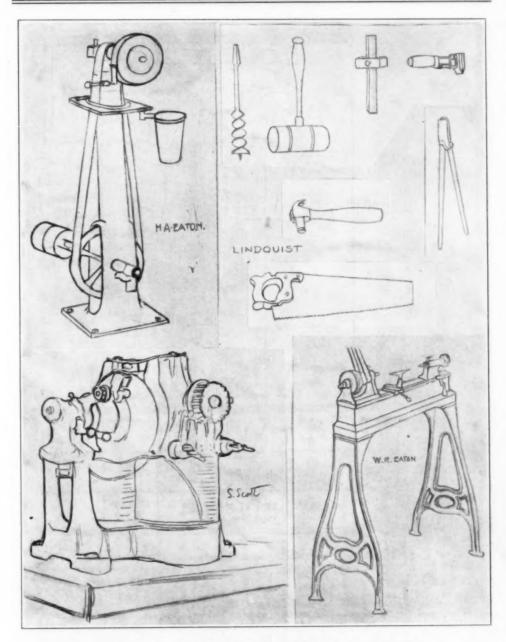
PLATE XXIII. A SHEET OF PENCIL DRAWINGS FROM THE OBJECT BY BOYS IN THE RINDGE TECHNICAL SCHOOL, CAMBRIDGE, MASS.
